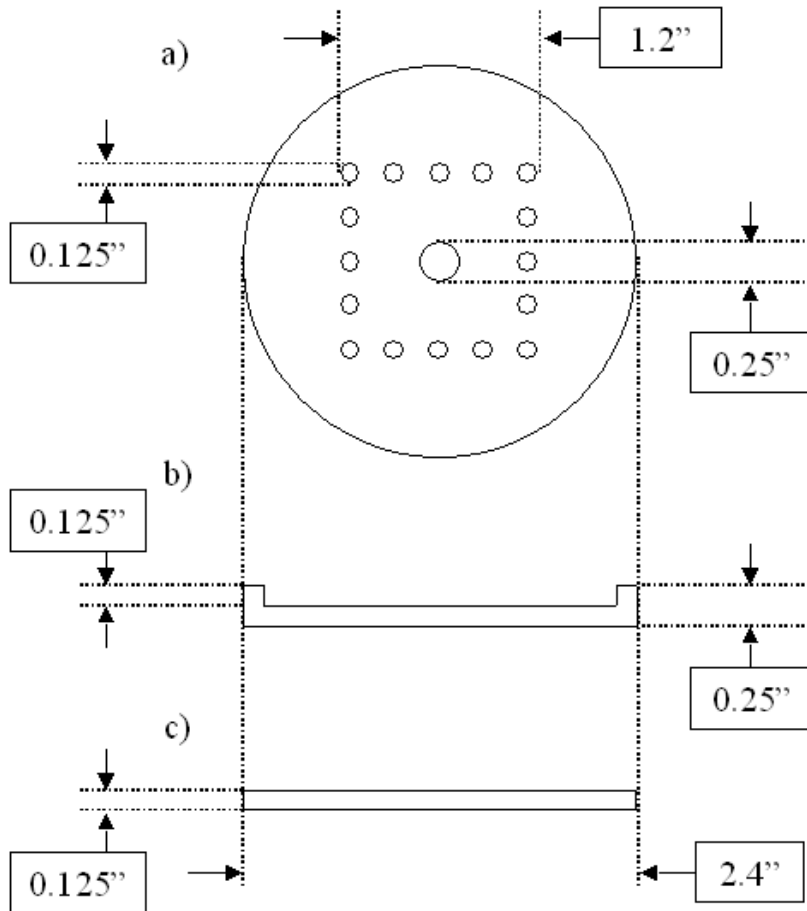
Schematic showing the dimensions of the two specialty plates used in the SLG construction. a) Looking along the beam axis showing the center hole where the beam passes, and the support rod holes. b) The horizontal crosssectional view of the base plate (first plate seen by beam entering detector) and the lip that is around the plate. c) Horizontal view of the last plate in the SLG.
